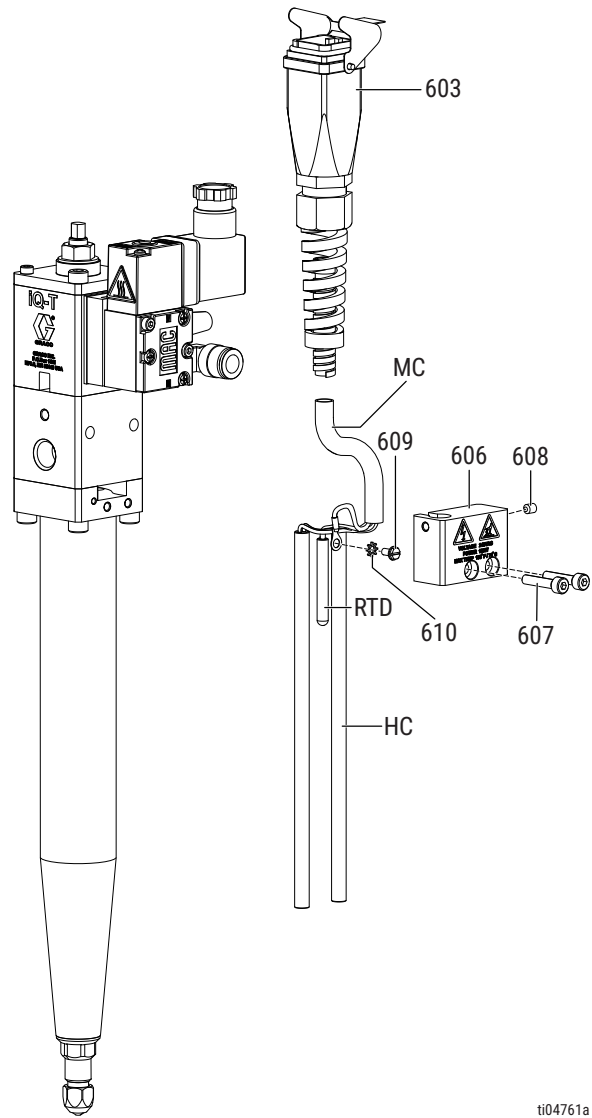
Heater Assembly for 200 mm Outlet Block
